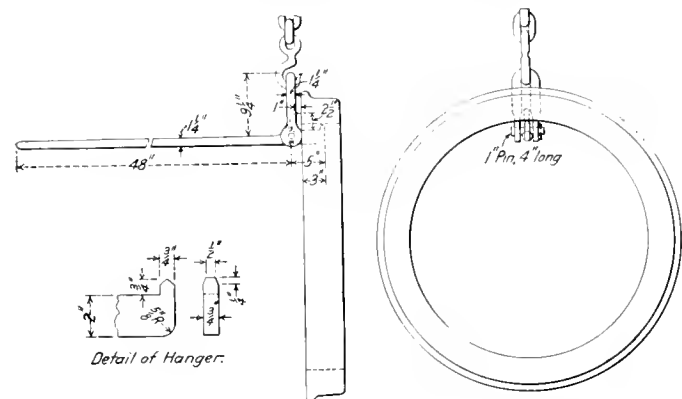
Details of Hanger Used for Mounting Driving Wheel Tires.
